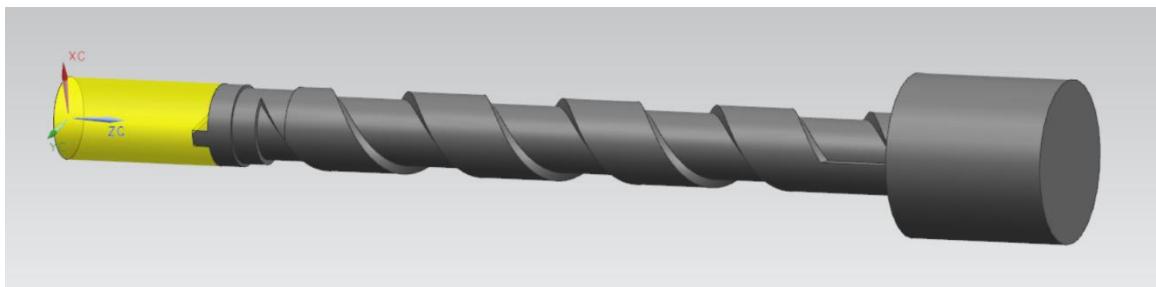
Rotating pusher with a step of 50 mm.
